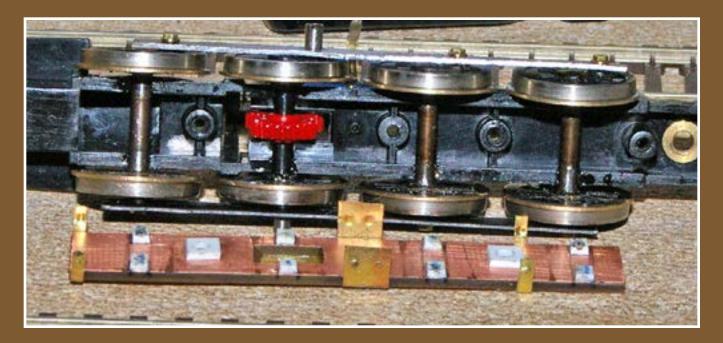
Before going to sprung plunger contacts, I made some simple wipers out of brass. They probably would have worked better if they were a little thinner, but these were too stiff and caused too much drag. You can see the styrene pieces I added to keep the axles in place, replicating cast on nubs on the original piece.
